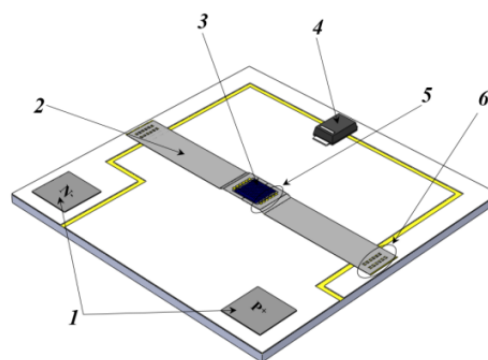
Appearance of the TQS of a single CPV receiver: 1 – N^- and P^+ contact pads of the combined board, 2 – flexible Al-PI interconnection board, 3 – SC, 4 – protection diode, 5 – flexible board lead for welding to the SC, 6 – flexible interconnection board lead for welding to the combined board.
